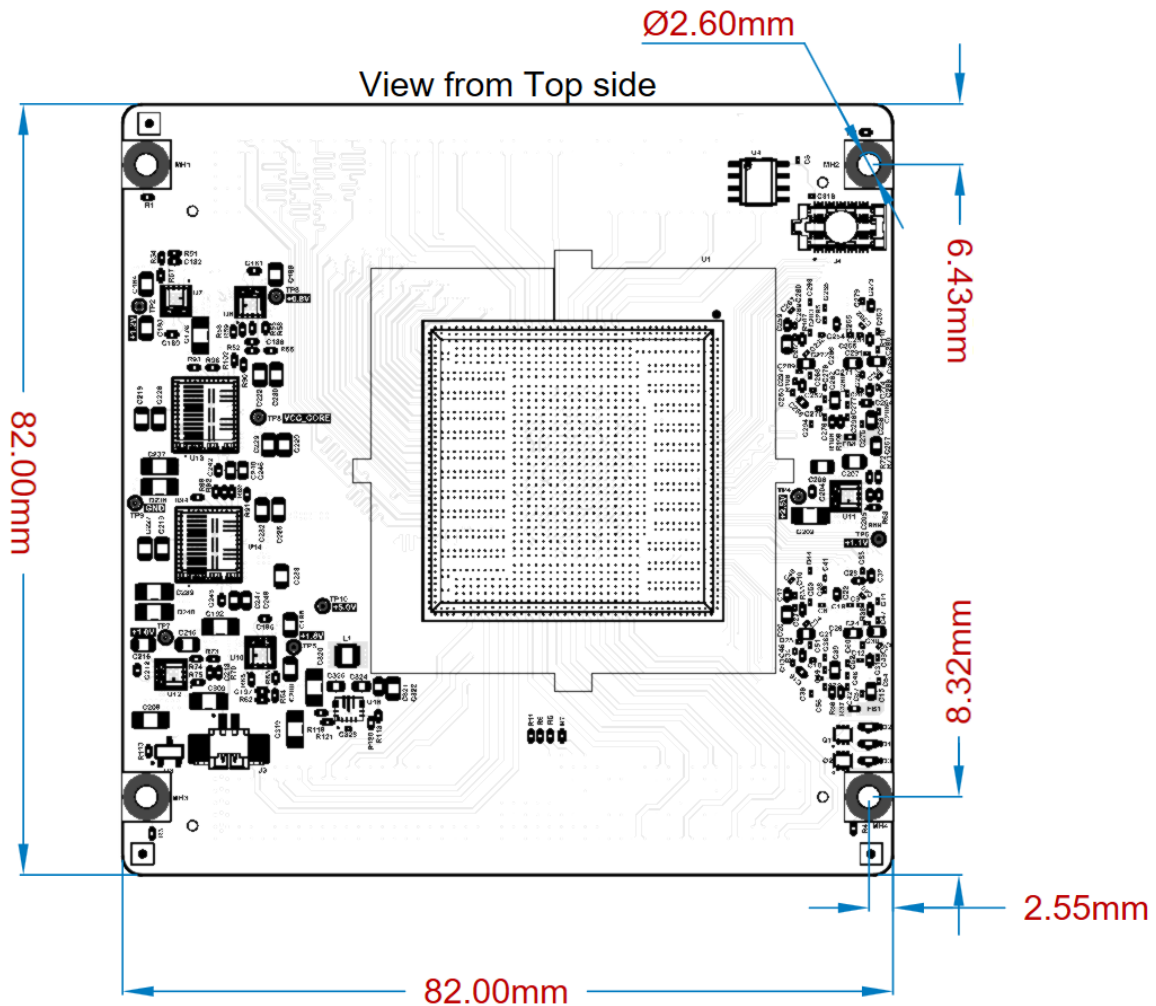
MitySOM-A5E Mechanical Outline, View from Top
